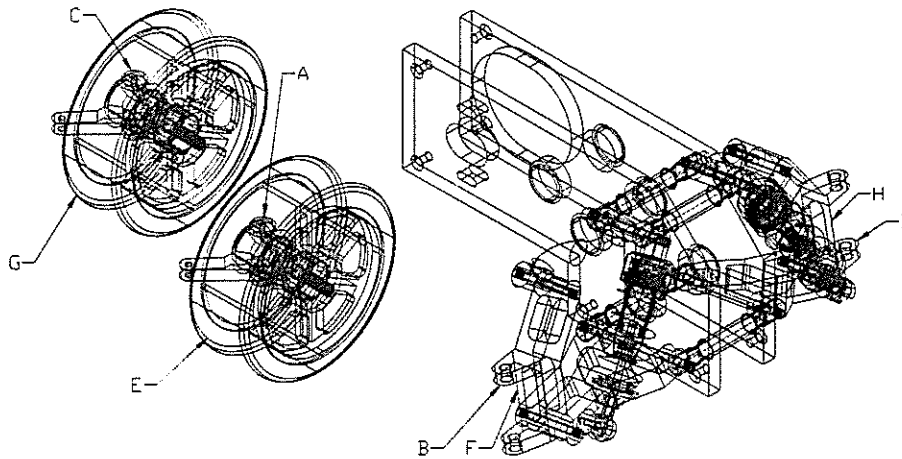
Shock absorbers constrained, front-wheel subassemblies instanced
